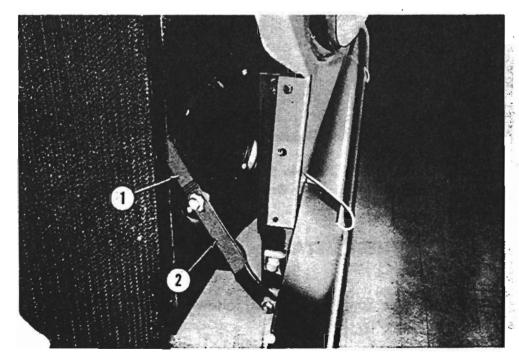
Take Out the Screw Holding the Moulding Support Lower Brace to the Upper Brace.
